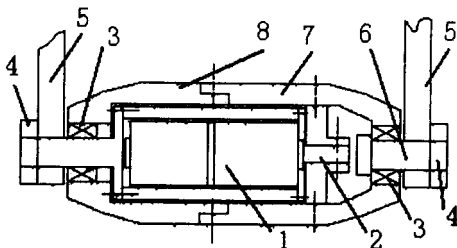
The inner structure of the small wheel. (1) motor; (2) output of the motor; (3) bearing; (4) fastening nut; (5) supporting frame; (6) supporting shaft; (7, 8) shell of the small wheel.
